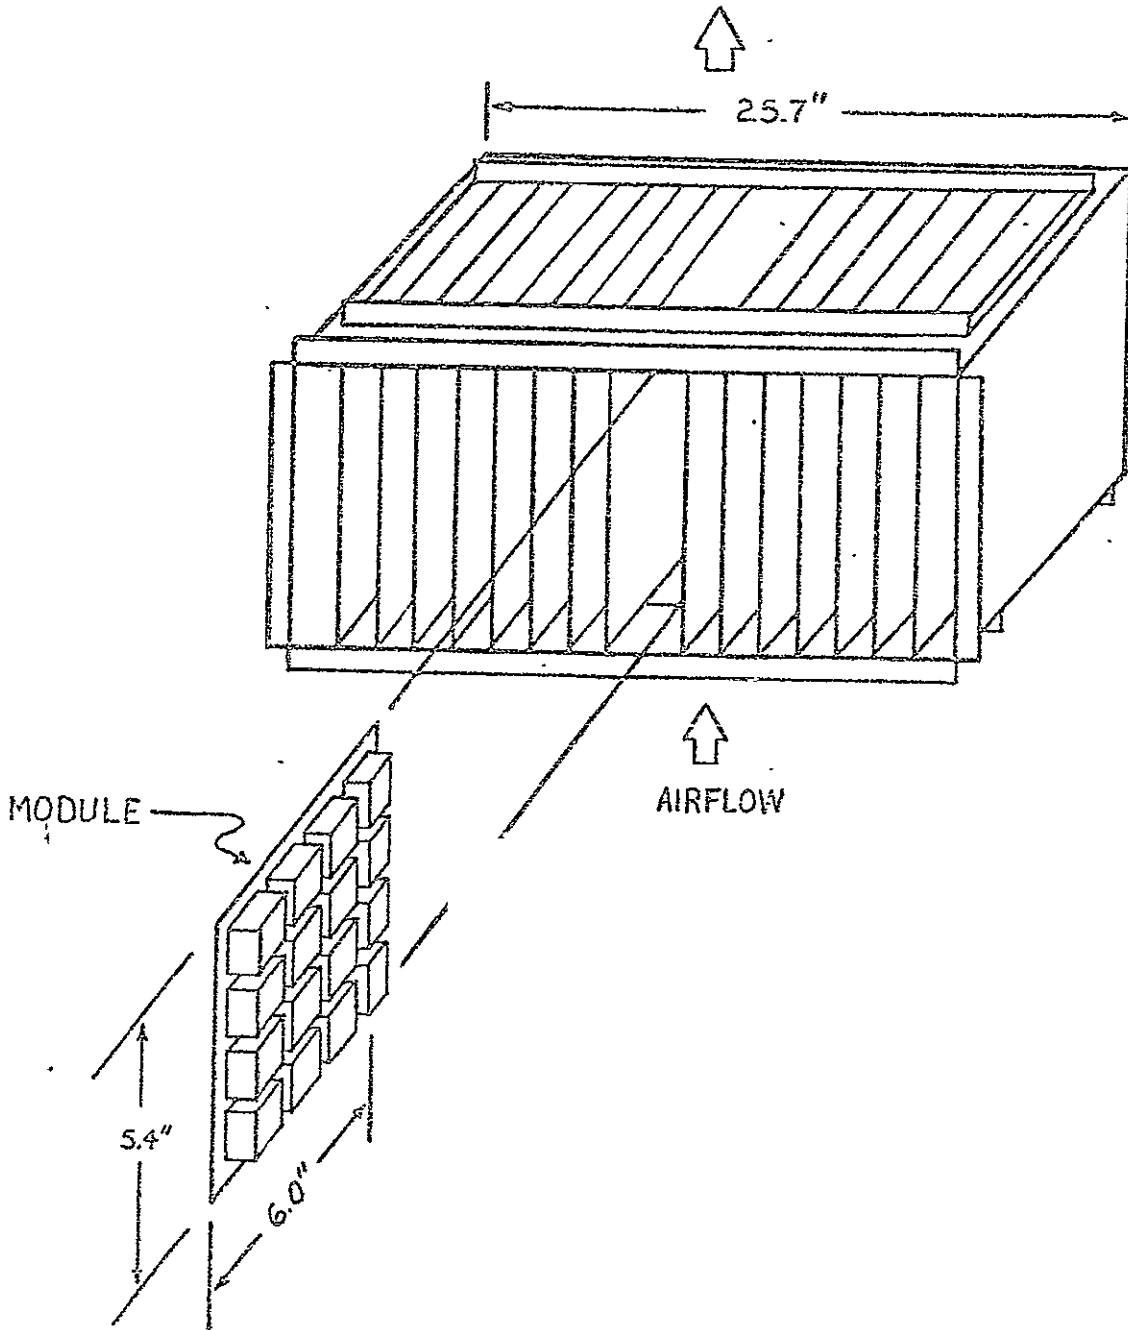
POWER CONTROLLER RACK ASSEMBLY
